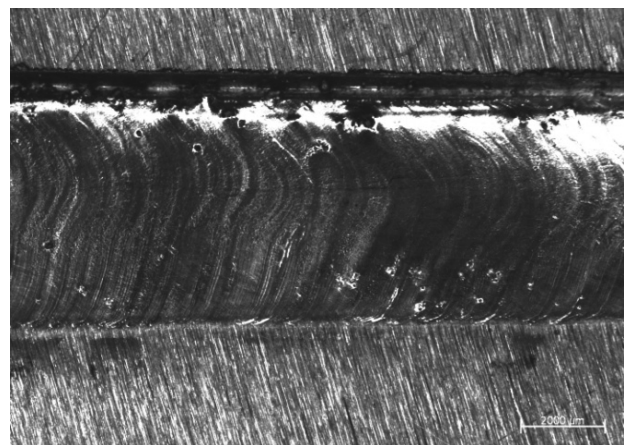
Part shape of bead face of the high speed steel HS6-5-2-5 surface alloyed with the VC, laser power 1.7 kW
